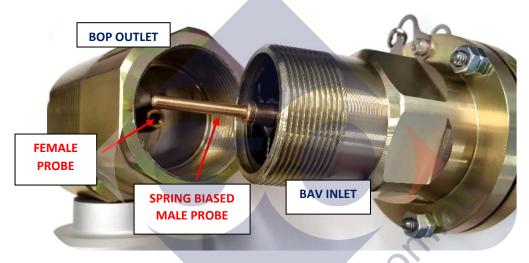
Aligning FuelTrack BAV Inlet with Break-Out Point Outlet
